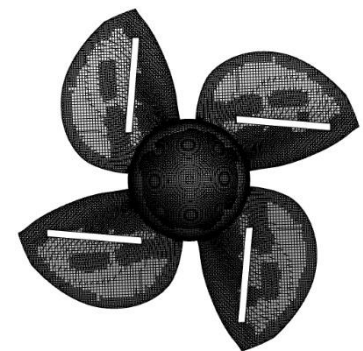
Grooved propeller 841-B and dimensions and size of the groove on the surface of the blade.
